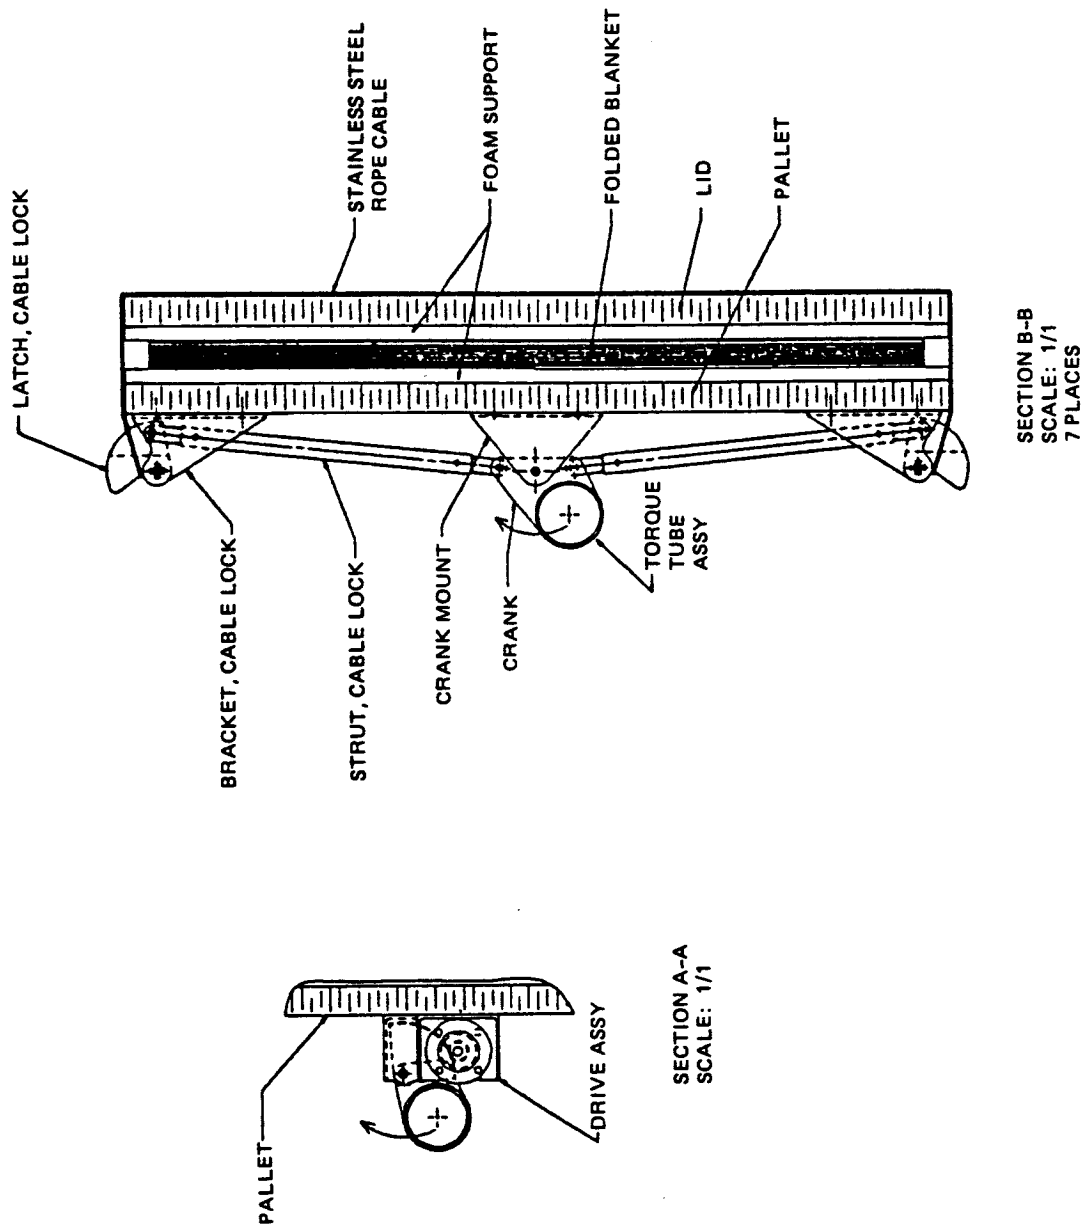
Stowed Blanket Preload/Release Torque Tube Mechanism
